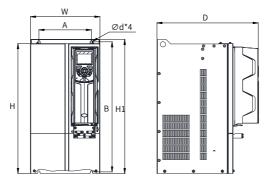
Overall and mounting dimensions of structures T2 to T9
